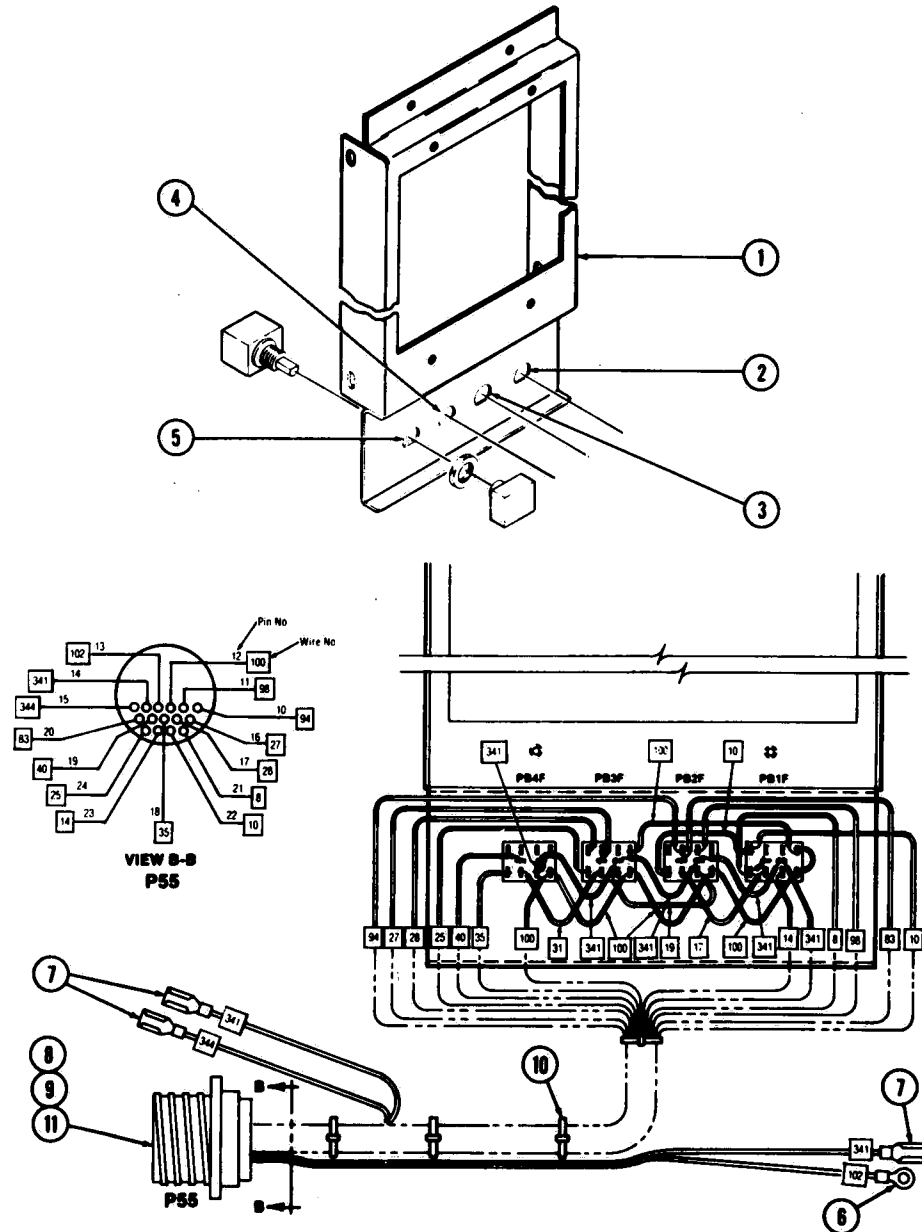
SWITCH ASSEMBLY: Operating End Power Door.
